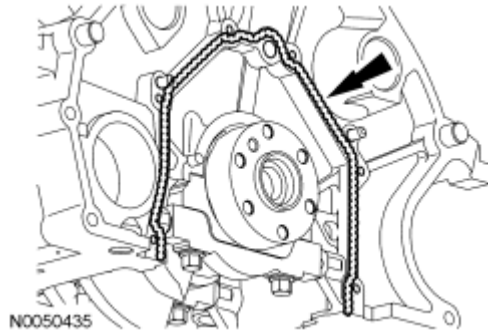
Applying Bead Of Gasket Maker To Rear Crankshaft Seal Retainer
